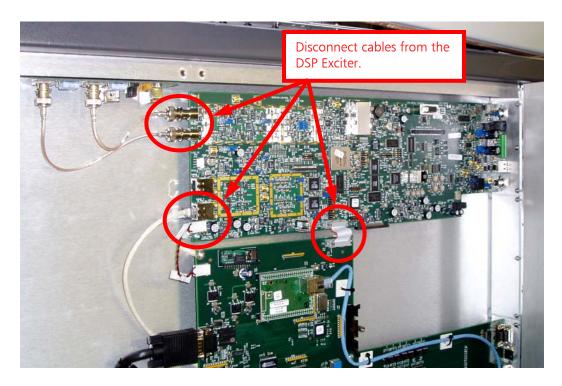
Disconnect Cables from the DSP Exciter PCB
